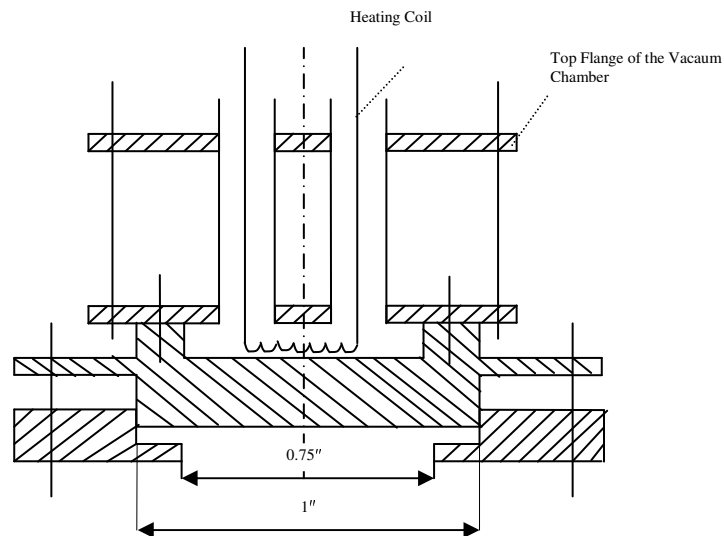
Substrate holder design to be used in the vacuum chamber (Fig. 7) for thin film deposition.
